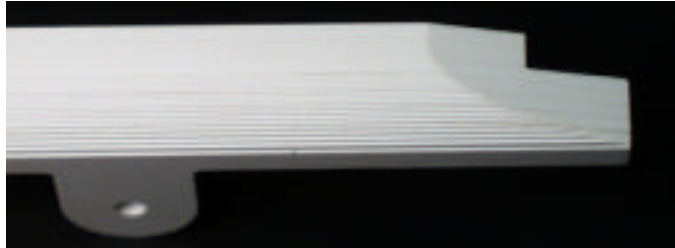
SWIFT part with sublayer 3-axis machining detail, sublayer thickness of 0.012”.
